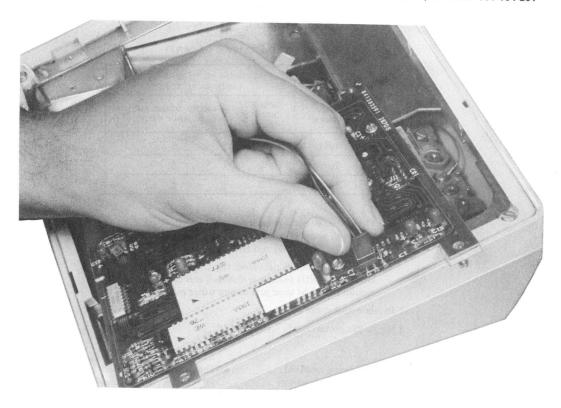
2870A1 Dial, Connection of D-180818 Kit of Parts, Record Disable Feature Only
